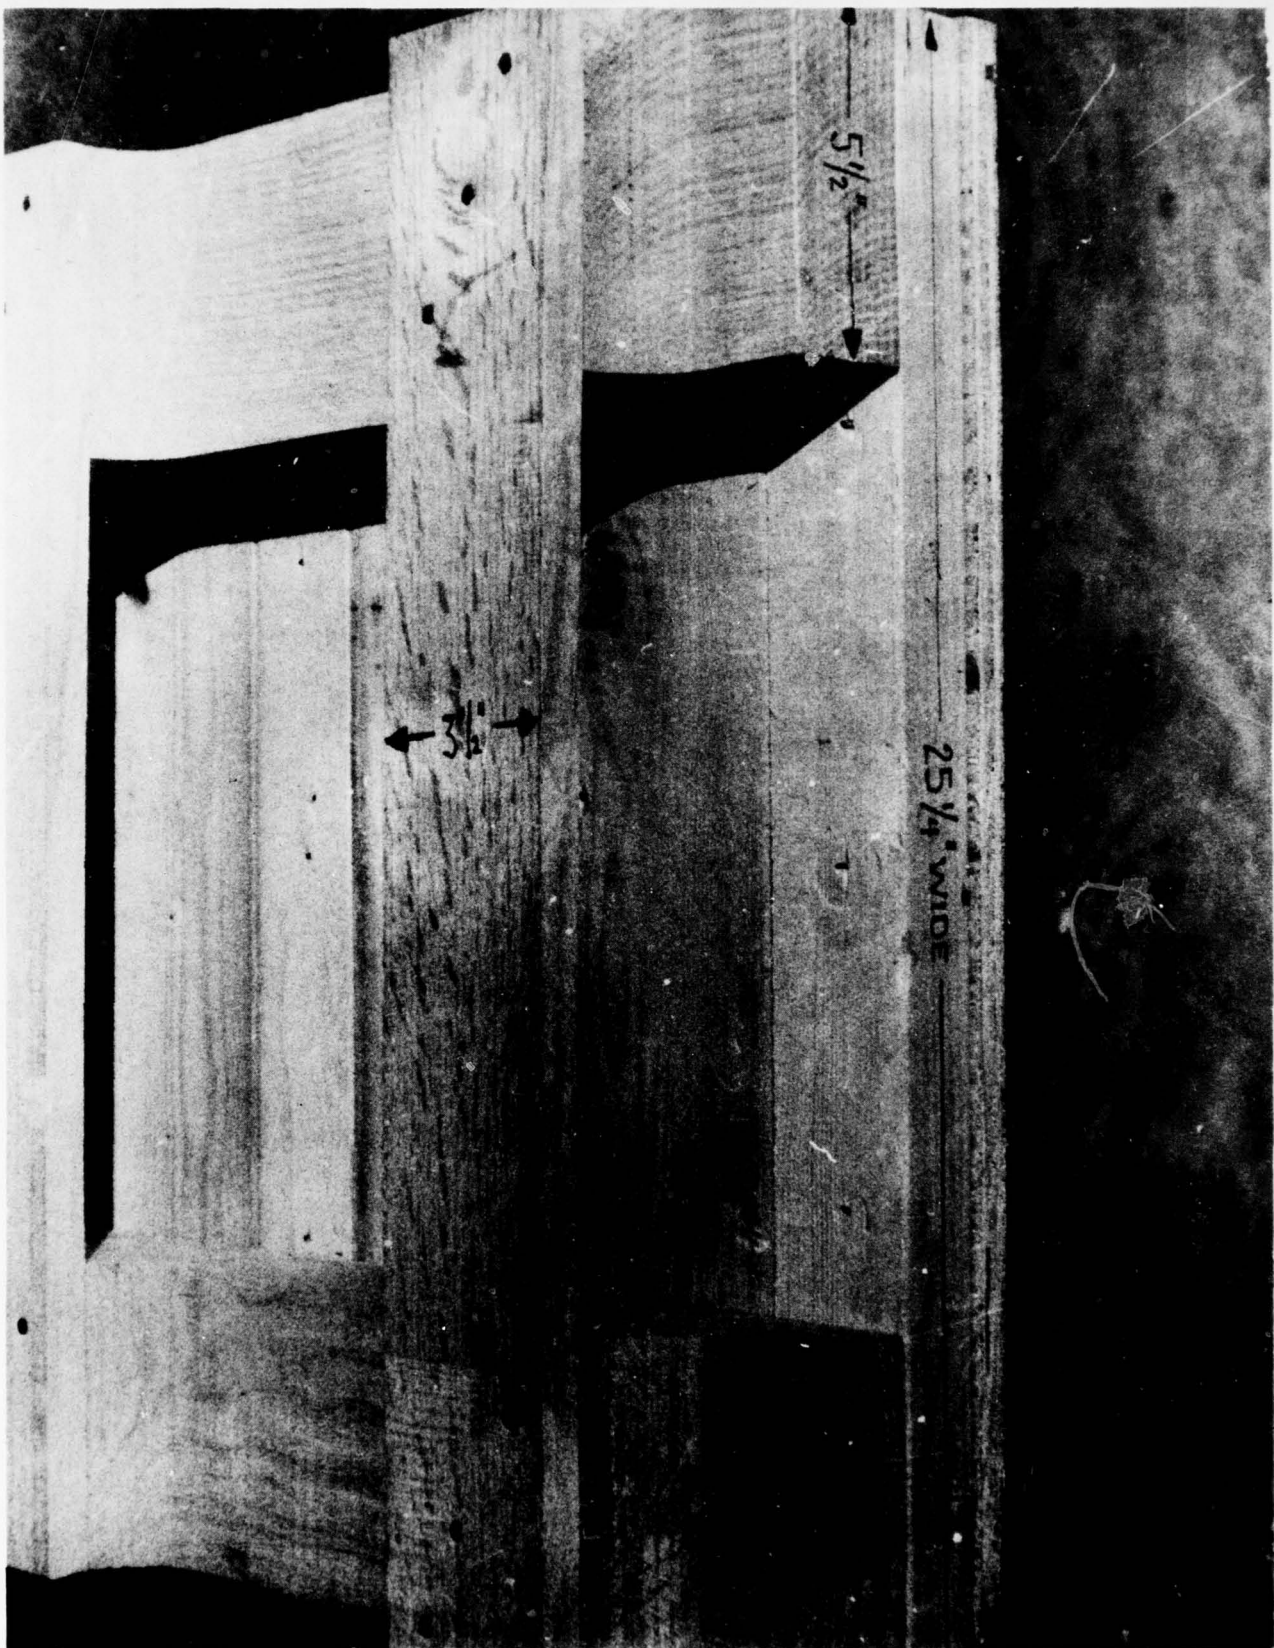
ARMY 155mm UNIT LOAD BOTTOM ADAPTER DETAIL
